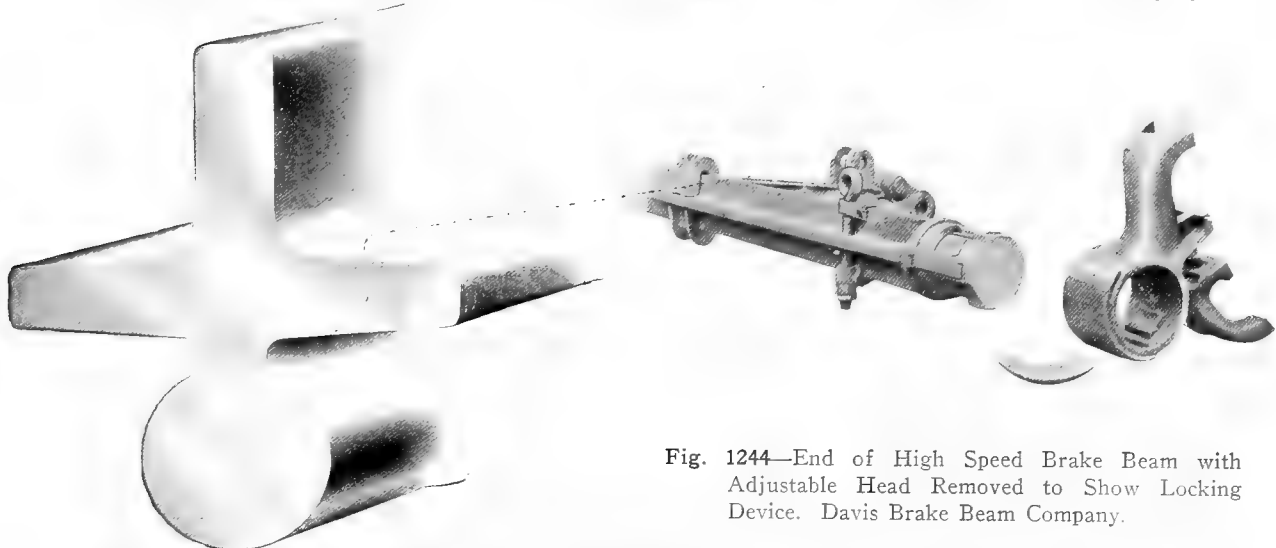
End of High Speed Brake Beam with Adjustable Head Removed to Show Locking Device. Davis Brake Beam Company.
